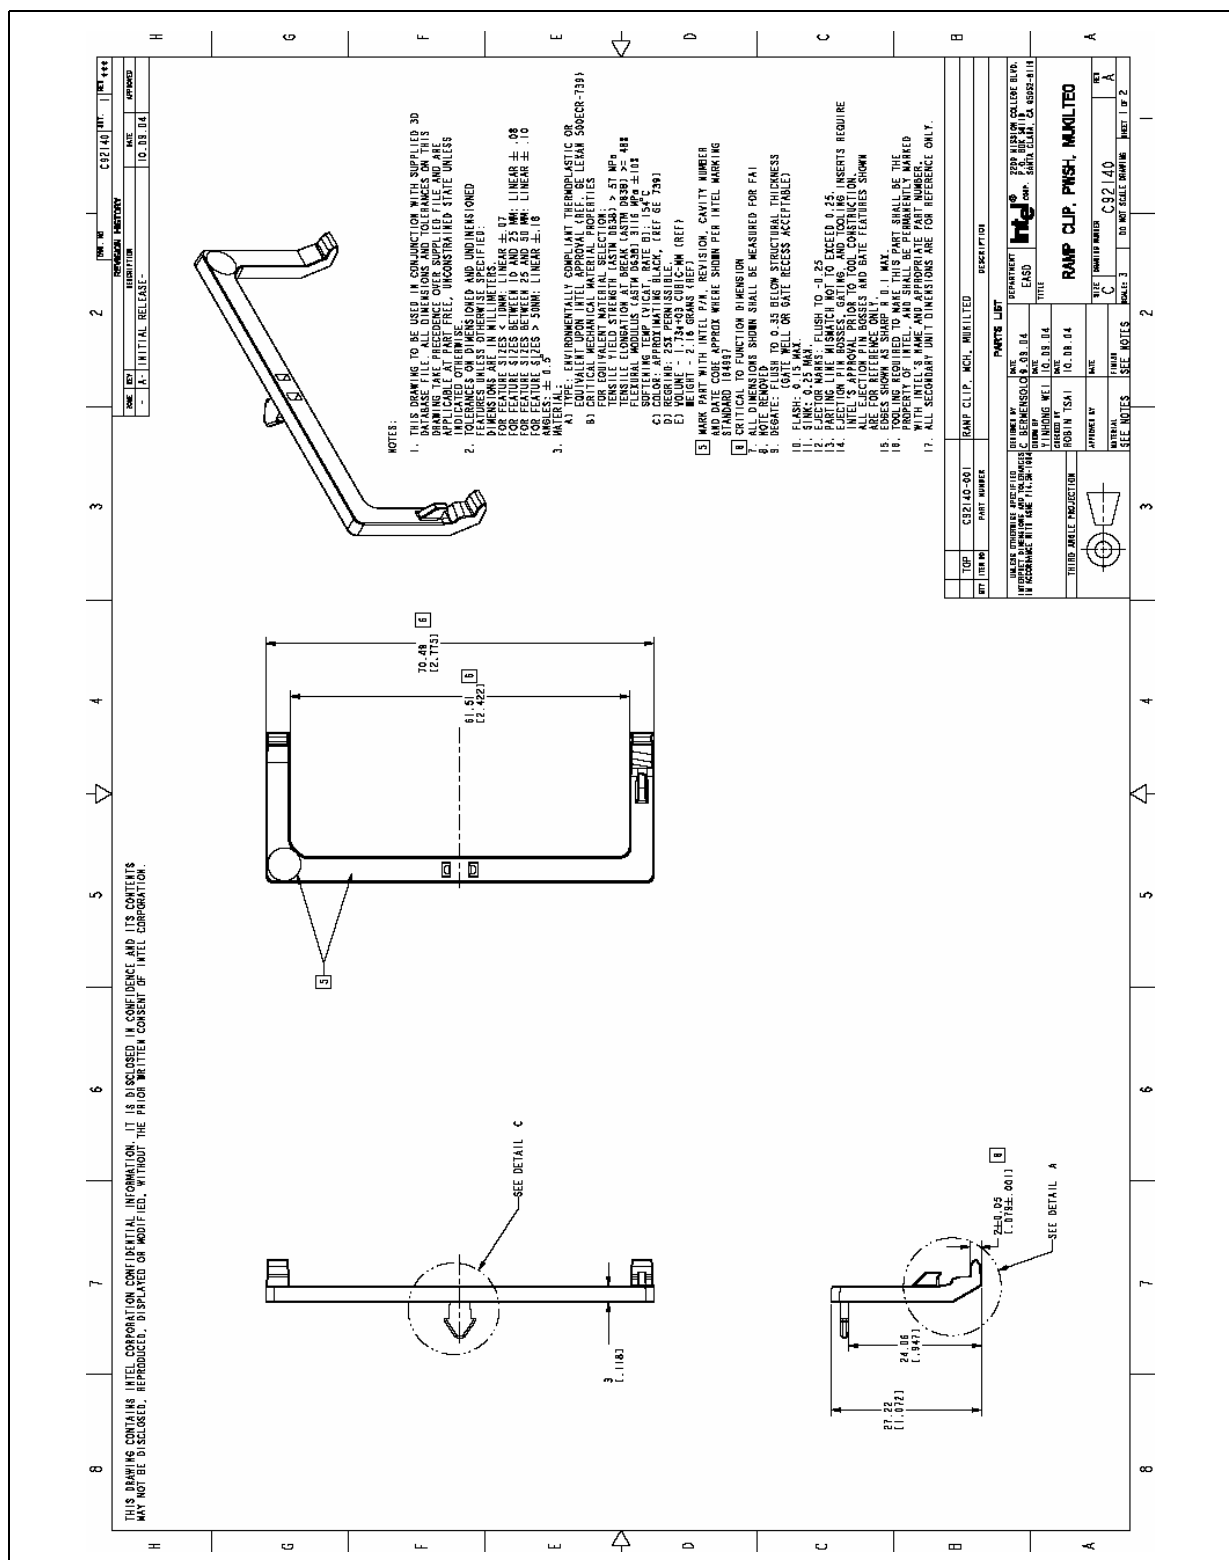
Plastic Wave Soldering Heatsink Drawing (1 of 2)
